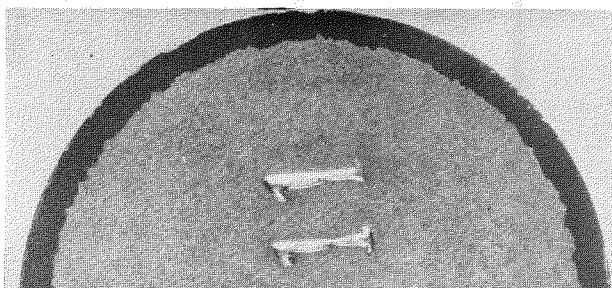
Irregular core-to-clad interface in the coextruded rod. Extrusion billet cores were machined from as-cast metal produced in an eight-cavity, 1-7/8 inch diameter mold. Note varying irregularity between front and rear of extrusions.
